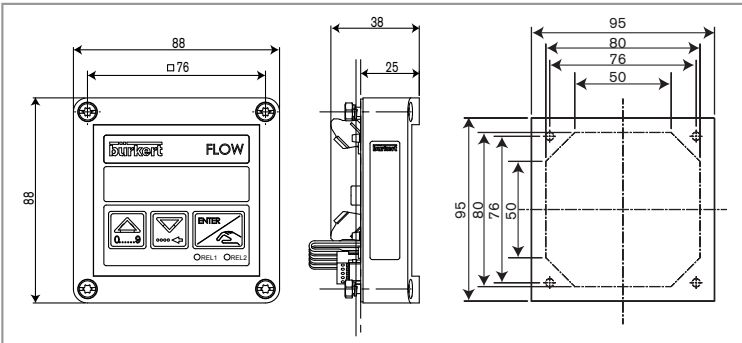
Dimensions of the transmitter, panel-mounted version, and cutting plan for the electrical cabinet door
